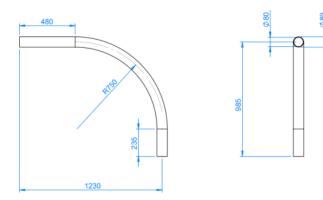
Technical drawing dimensions of the rotating arm of the bale wrapping machine
